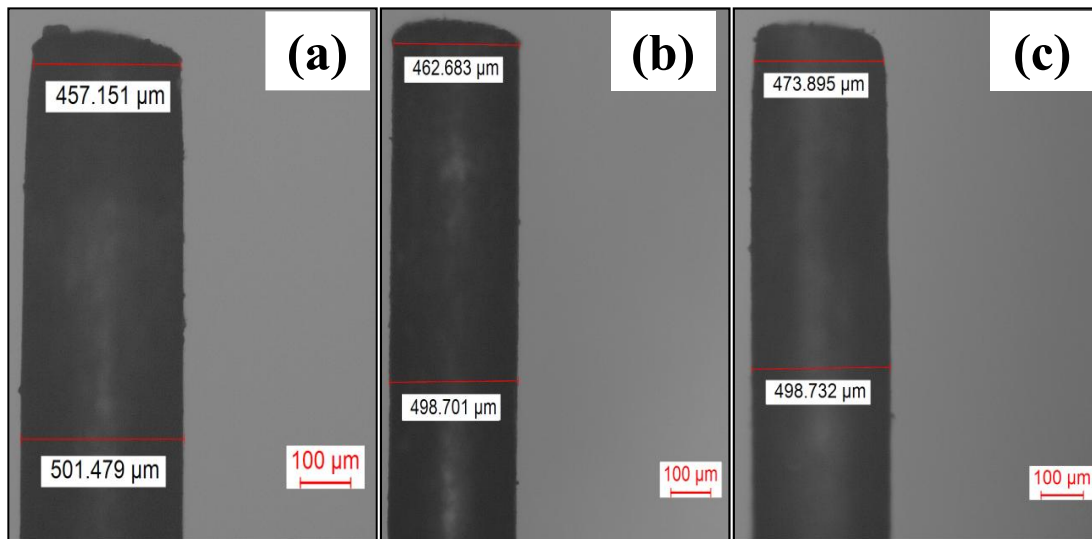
27 Tool after machining with (a) Existing tool feeding, (b) Bottom tool feeding, (c) Upward tool feeding
